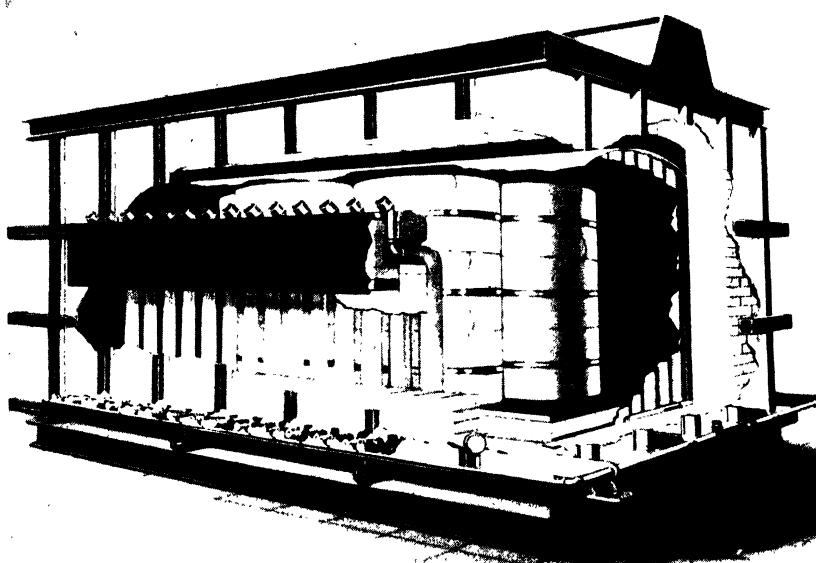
Radiant-tube annealing cover, with tubes arranged vertically instead of horizontally. (Courtesy Wean Engineering Co.)
